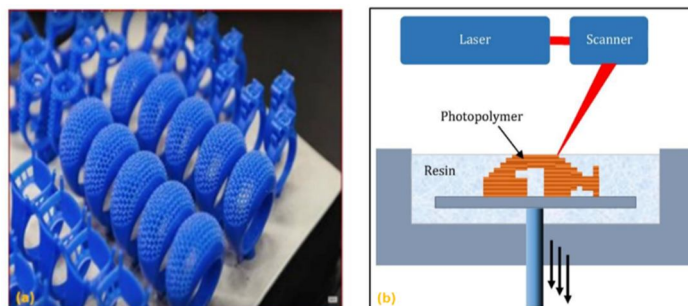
(a) Printed Parts, (b) Schematic illustration of SLA 3D printing technique. [5]
